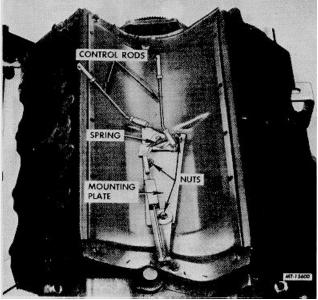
Swirl Destroyer Linkage Removal (Early production engines only)
